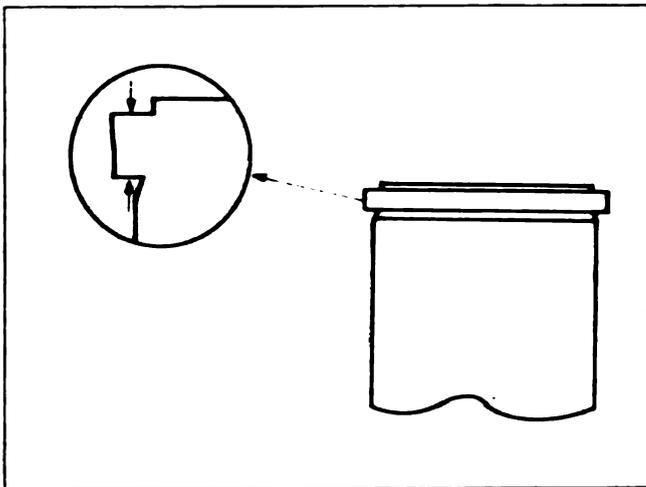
(V401104). The Cylinder Liner Flange.
